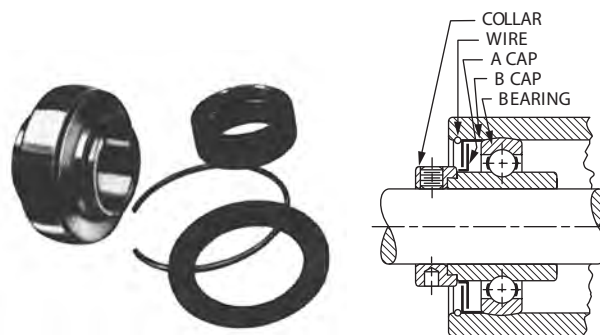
shows a machine unit with an A-type bearing carrying the designation MUA (standard series) and MUOA (heavy series). It consists of a wide inner ring, open type or one-piece R-seal bearing, collar, caps and wire. The “caps” are two steel members which comprise a non-integral frictionless labyrinth seal. The inner member is pressed on the inner ring and rotates with it. The outer member is pressed in the housing against the face of the outer ring and is held in place by the round retaining wire.
